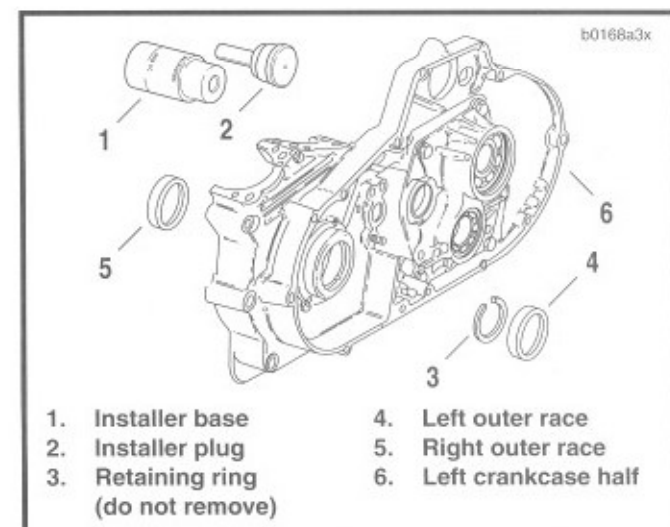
Installing Sprocket Shaft Bear Outer Races
